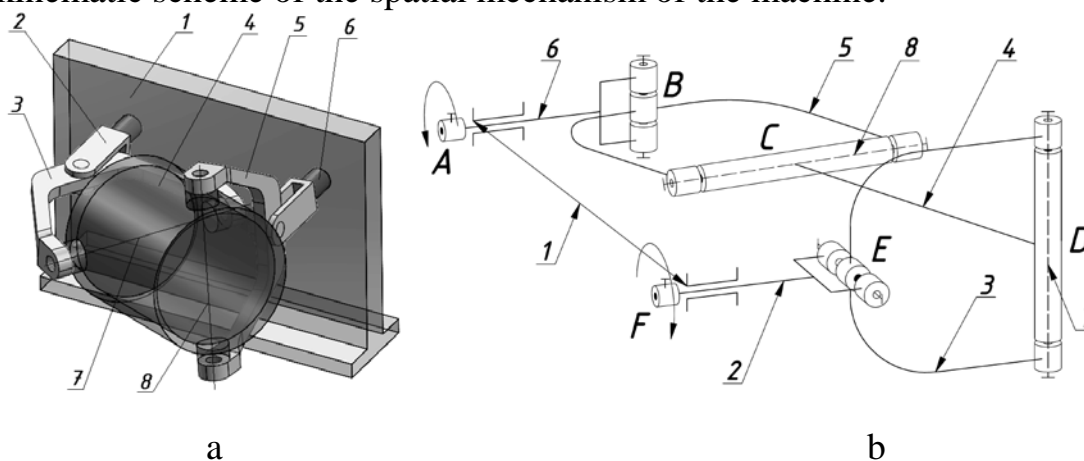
a – the model of the machine; b – the kinematic scheme of the spatial mechanism of the machine
